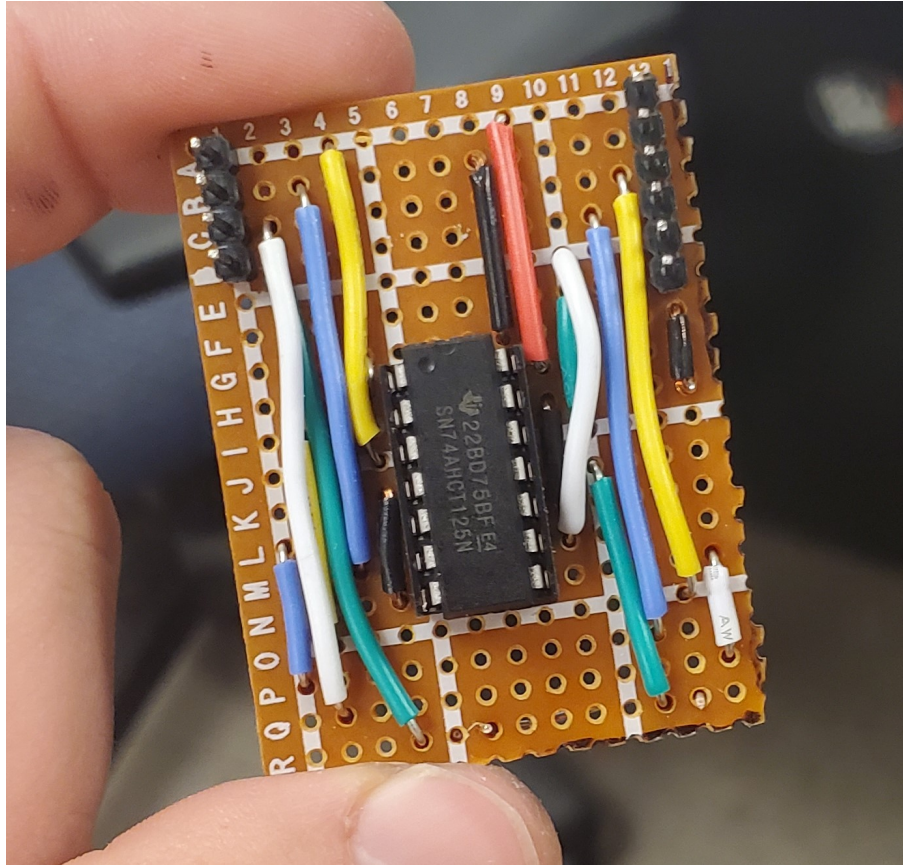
Constructed SN74AHCT125N Breakout Board without Output Wires
